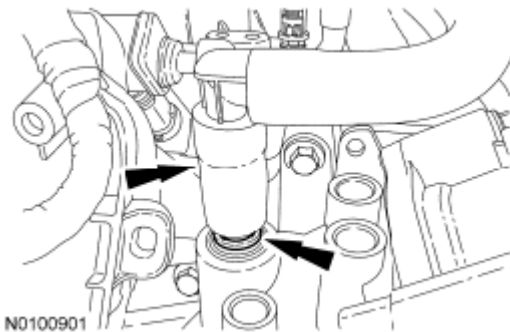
Locating Vacuum Tube Of Quick Release Fitting
